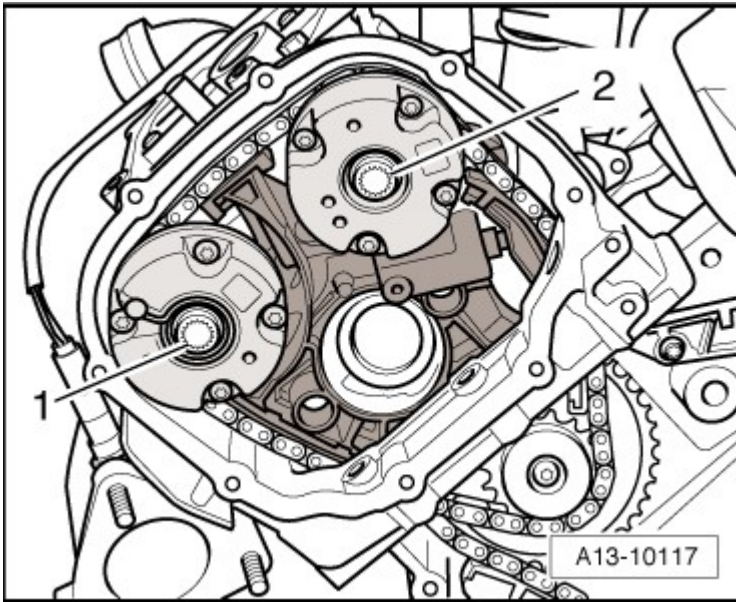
Identifying Camshaft Adjuster Screws On Left Cylinder Head, Removal/Installation
